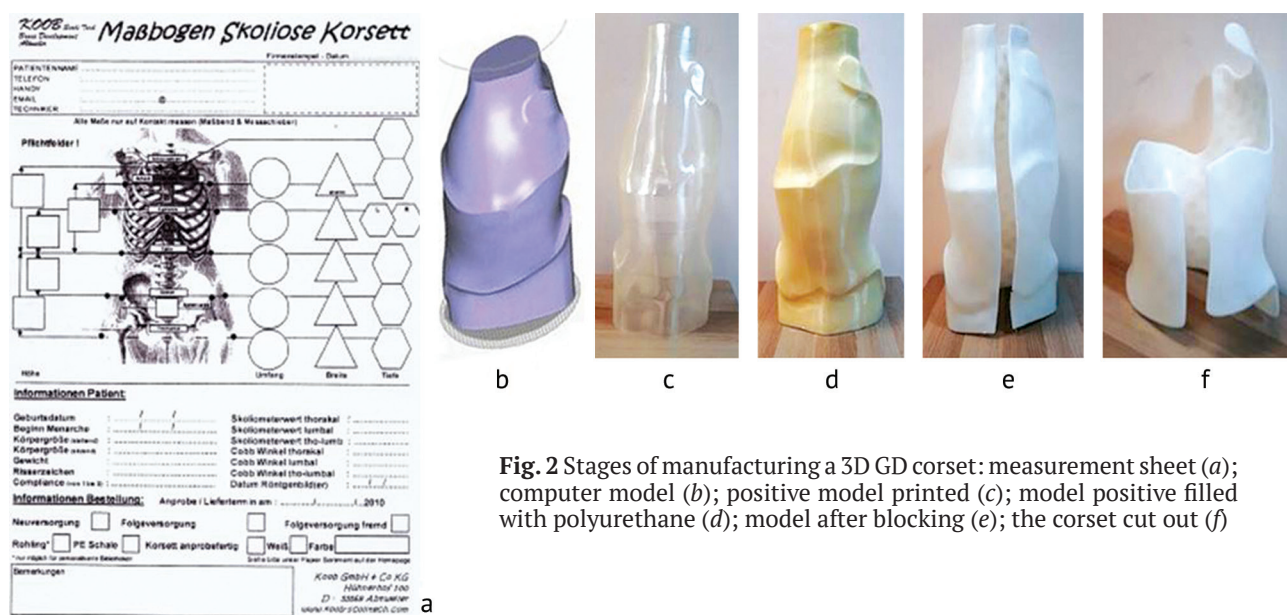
Stages of manufacturing a 3D GD corset: measurement sheet (a); computer model (b); positive model printed (c); model positive filled with polyurethane (d); model after blocking (e); the corset cut out (f)
